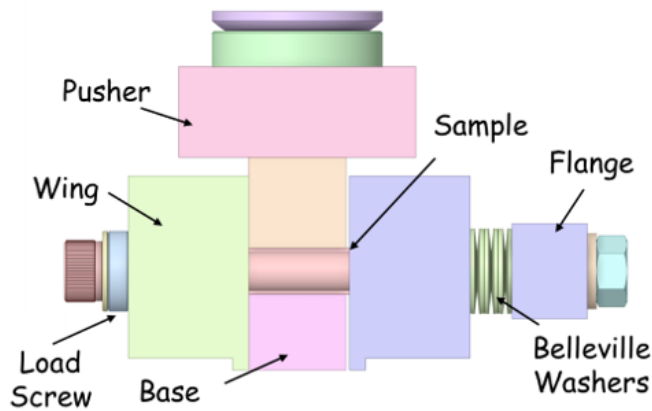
Sample holder for bi-axial loading of cable stacks.
